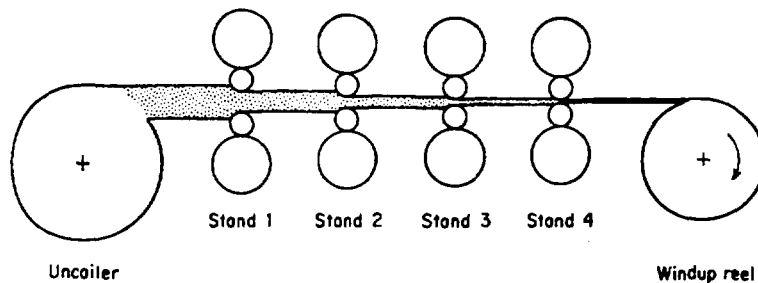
Schematic drawing of strip rolling on a four-stand continuous mill.
